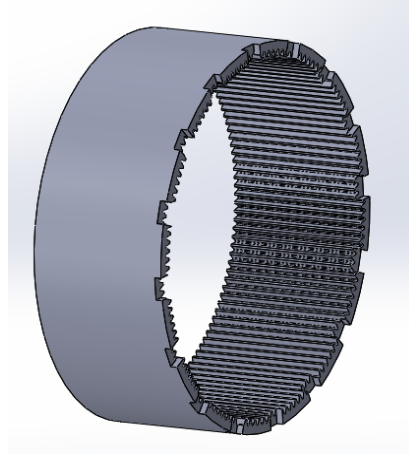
final version of the ring gear, with the tothing pattern on the side surface
